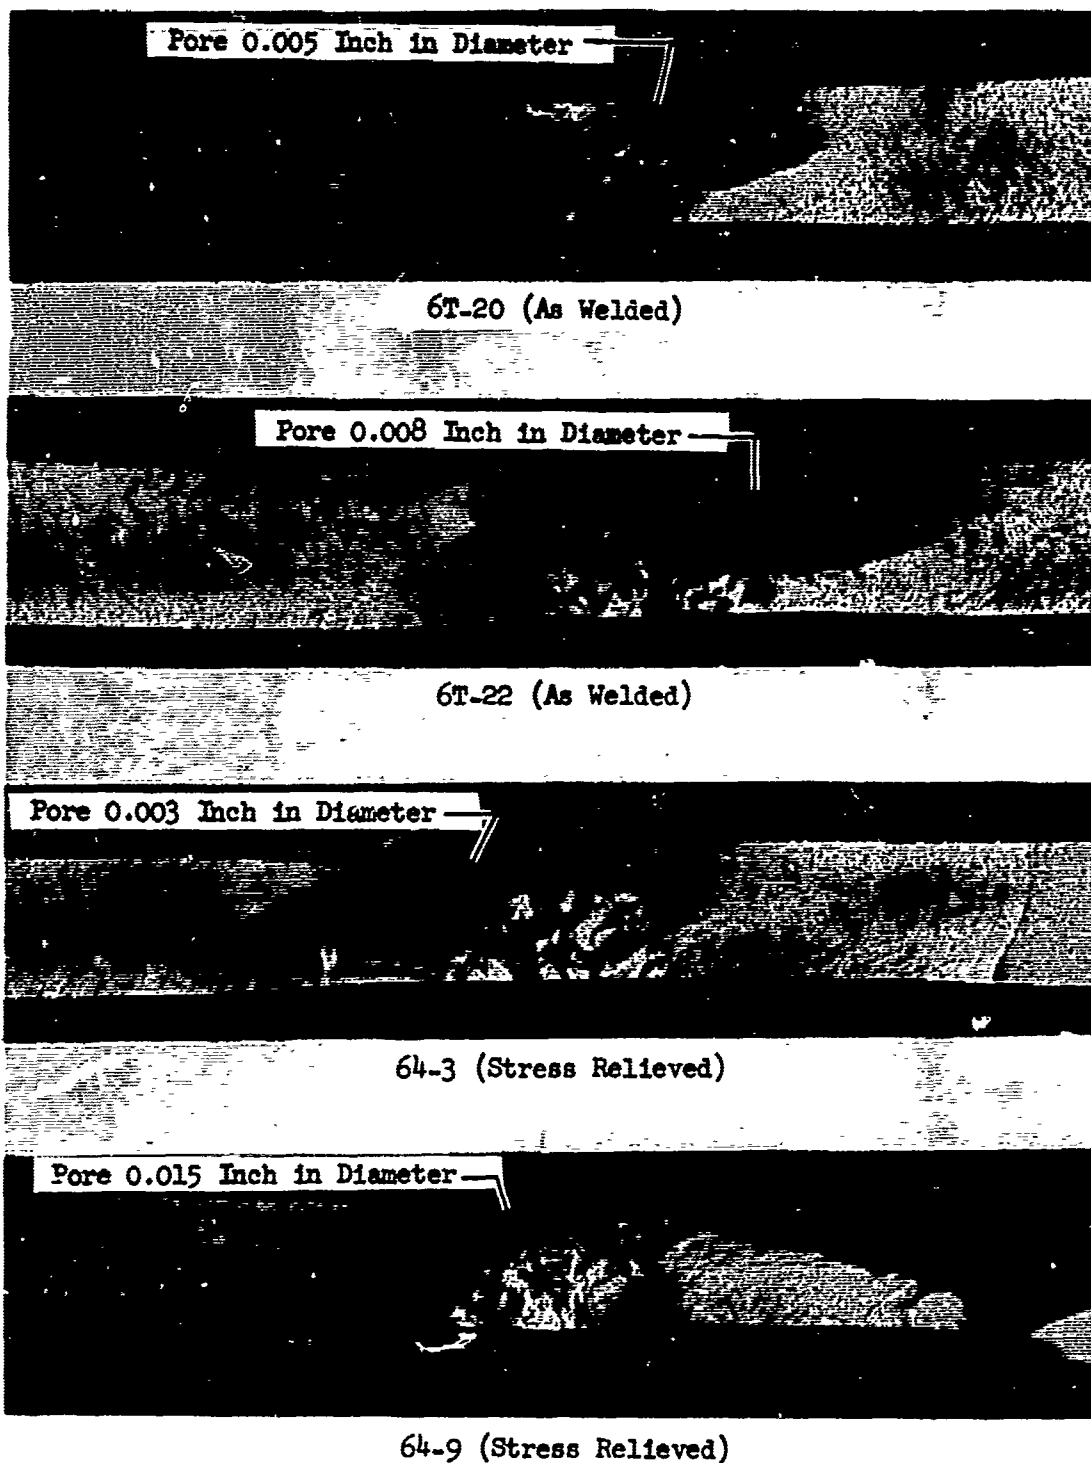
Fatigue Specimen Fractured Areas in 0.200-Inch Ti-6Al-4V Weld Panels, Mag. 3X
